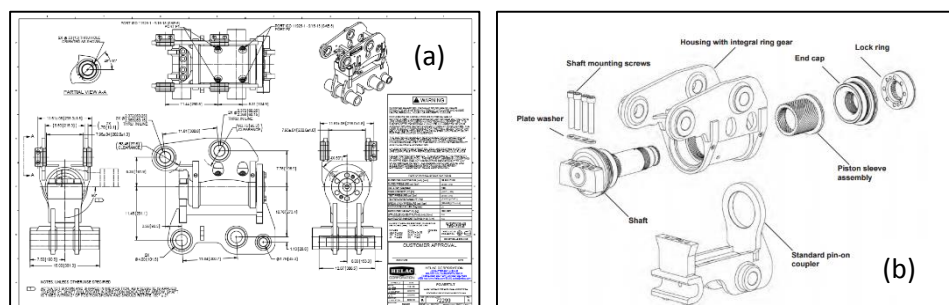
(a) Orthographic projection of leveller, (b) Exploded assembly of leveller [26].
